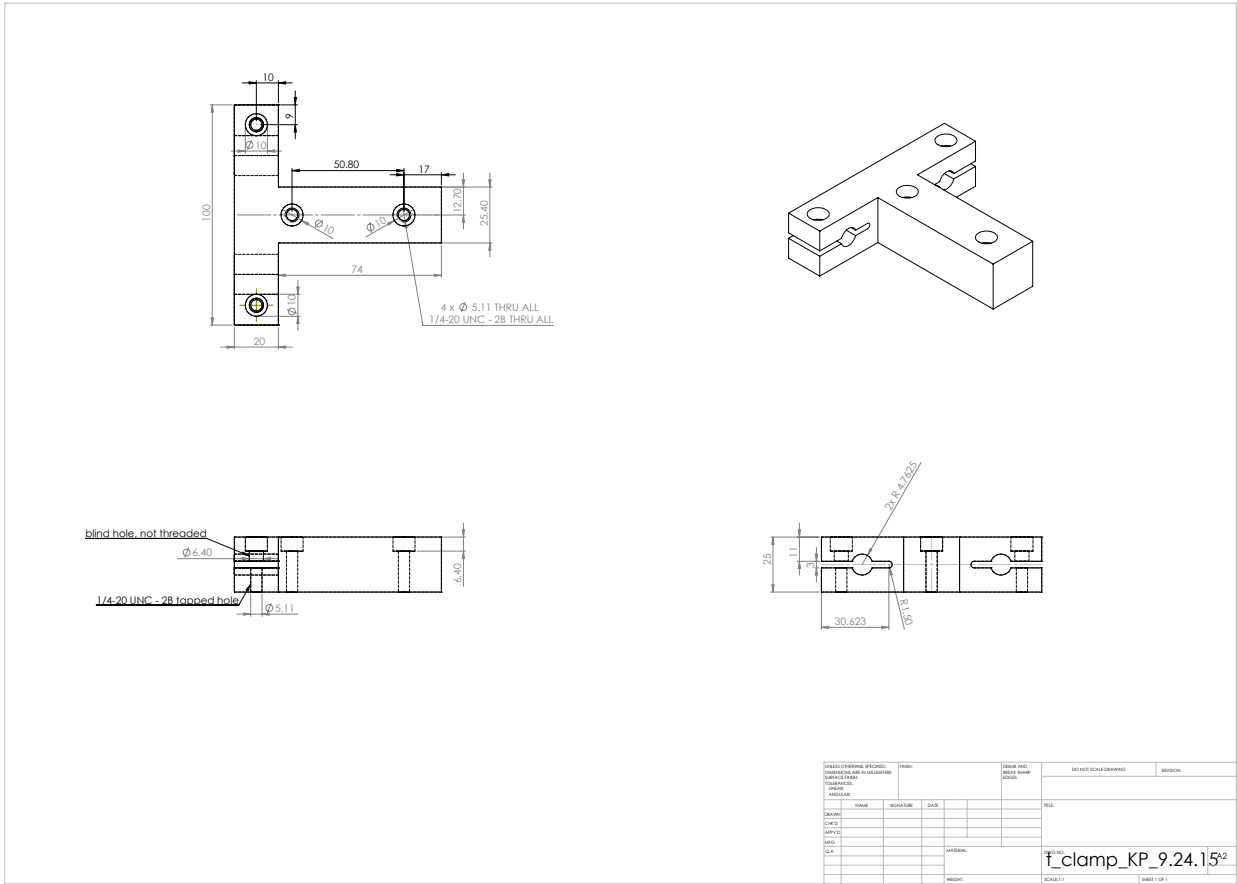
Drawing for t-clamp that holds the linear rails and connects to table stand.
